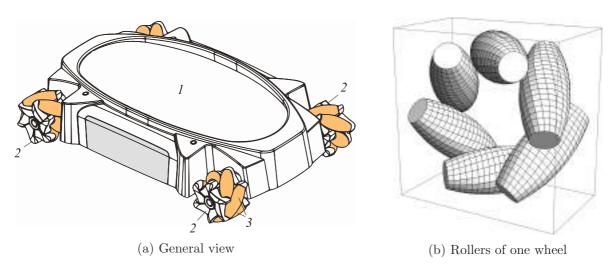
Mobile omnidirectional platform of the youBot robot (1 — platform; 2 — Mecanum wheels; 3 — rollers)
